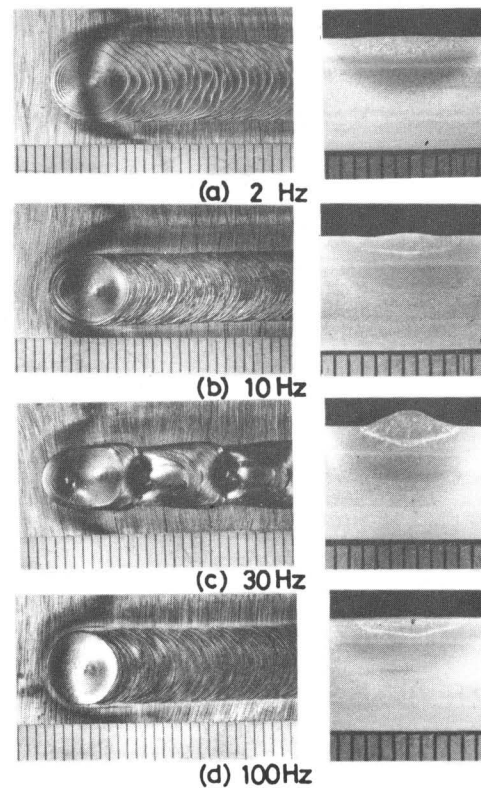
Typical bead appearances and cross sections in pulsed TIG welding. ($I_{av}=150A, I_a=80A, I_p=230A, I_b=70A$, rectangular wave, welding speed=10cm/min vertex angle=30°, arc length=3mm, mild steel plate 9mmt.)
